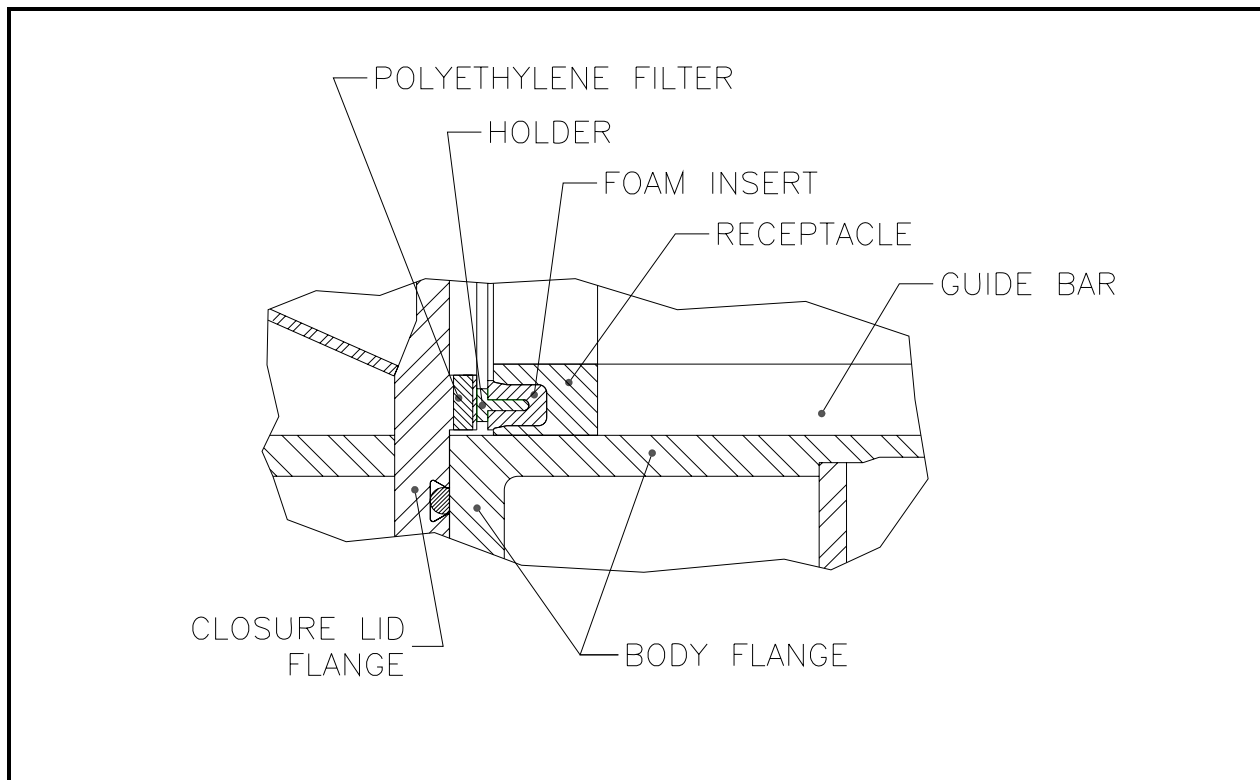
Debris Shield Cross Sectional View
